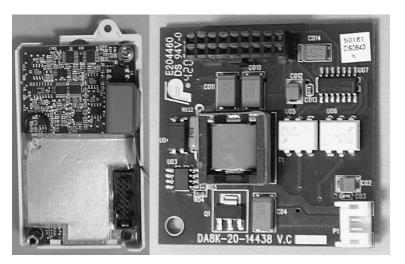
Nellcor SpO₂ board and isolated power supply.
